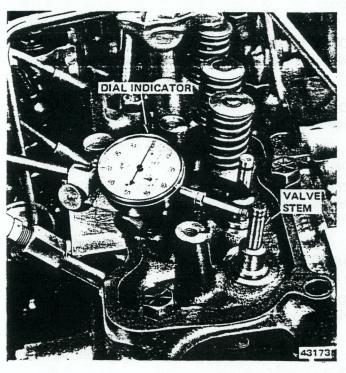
Valve Stem-to-Guide Clearance Measurement with Dial Indicator
